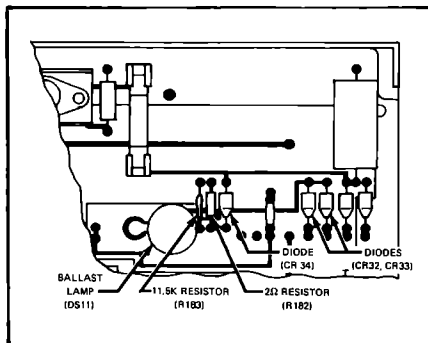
COMPONENT INSTALLATION MAIN PCB
